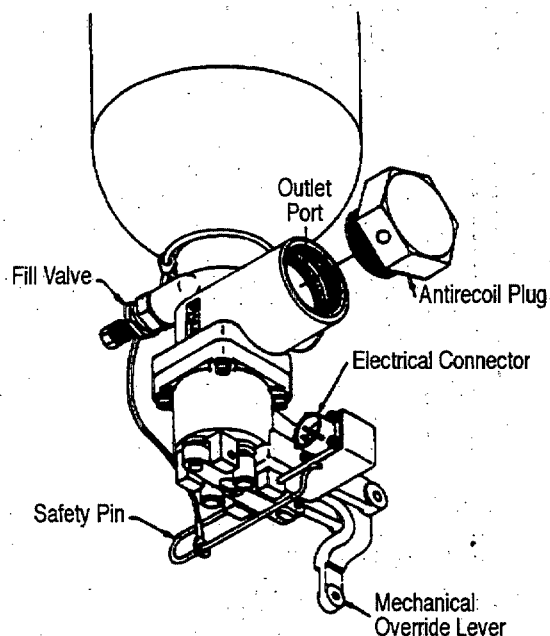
Solenoid Valve Schematic (Ref. 82)
